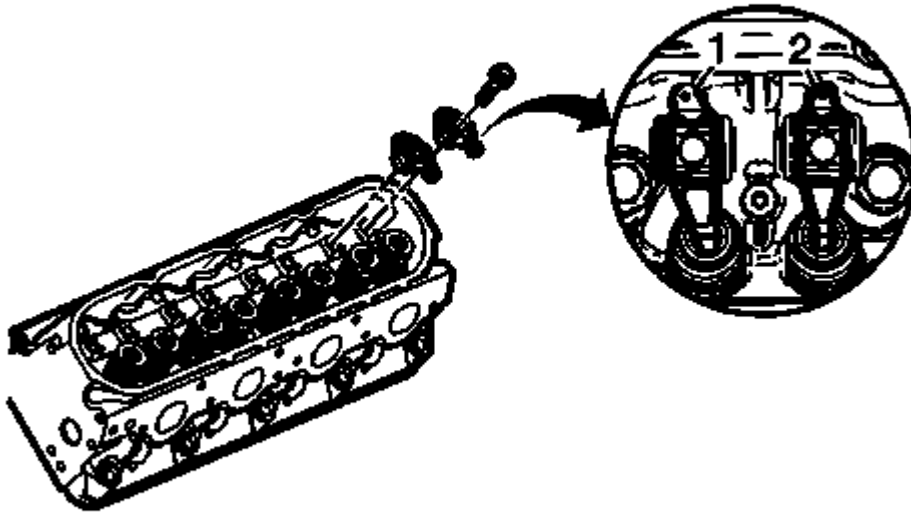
View Of Offset Intake Rocker Arm & Intake Rocker Arm
